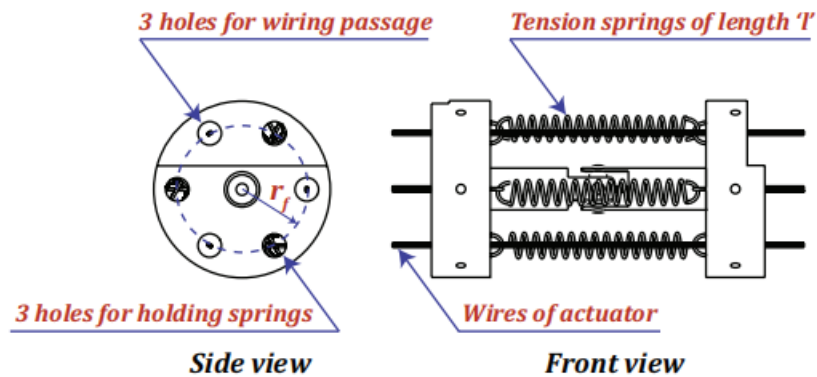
Proposed tensegrity structure with three springs and a universal joint
